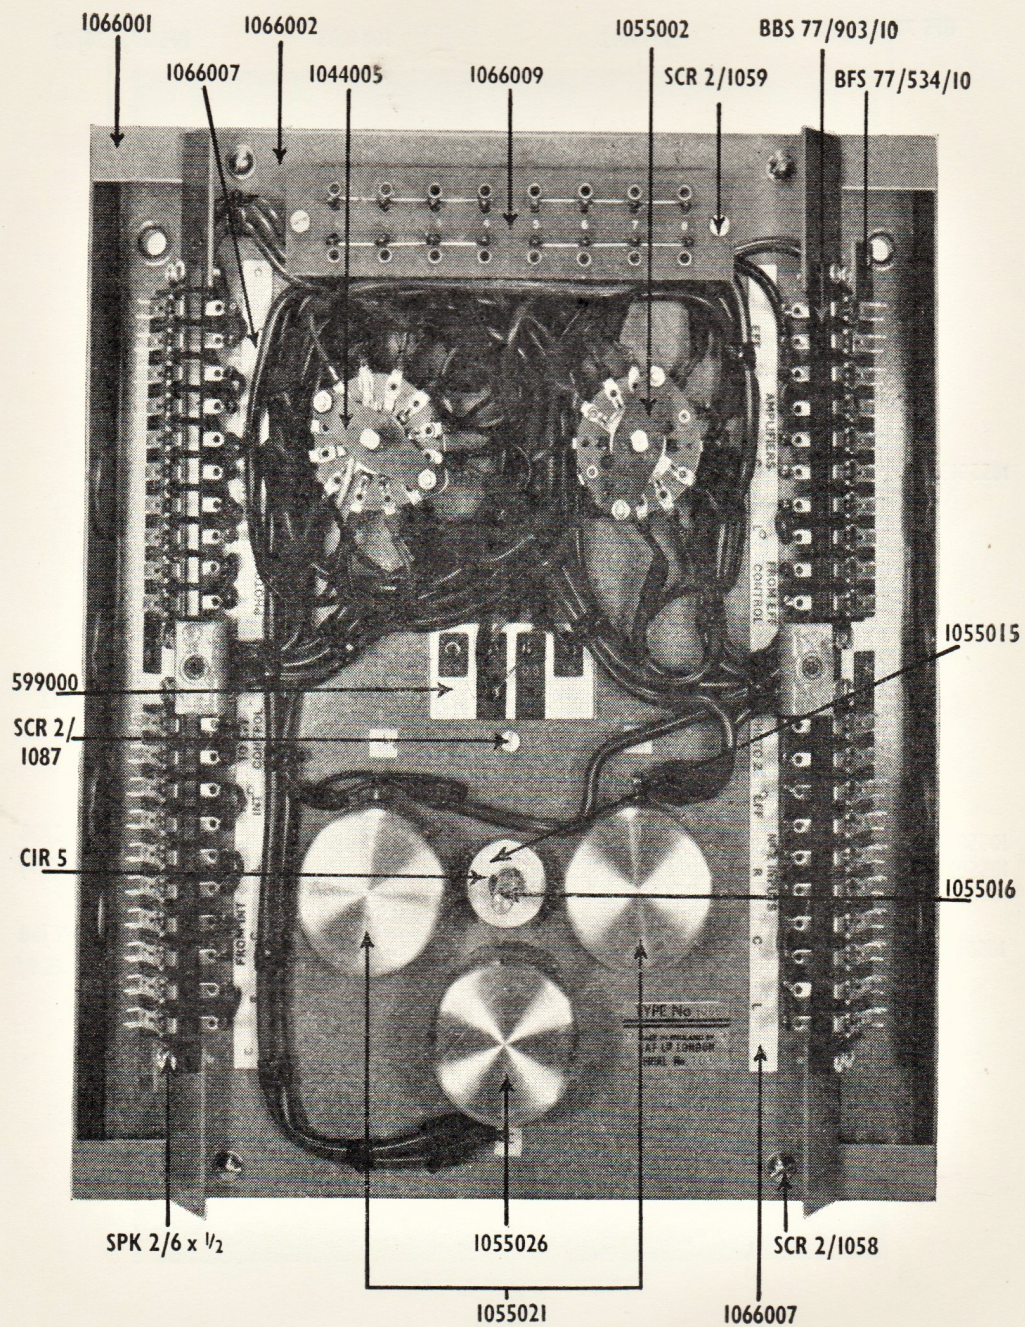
SPARE PARTS. CHASSIS (FRONT)
